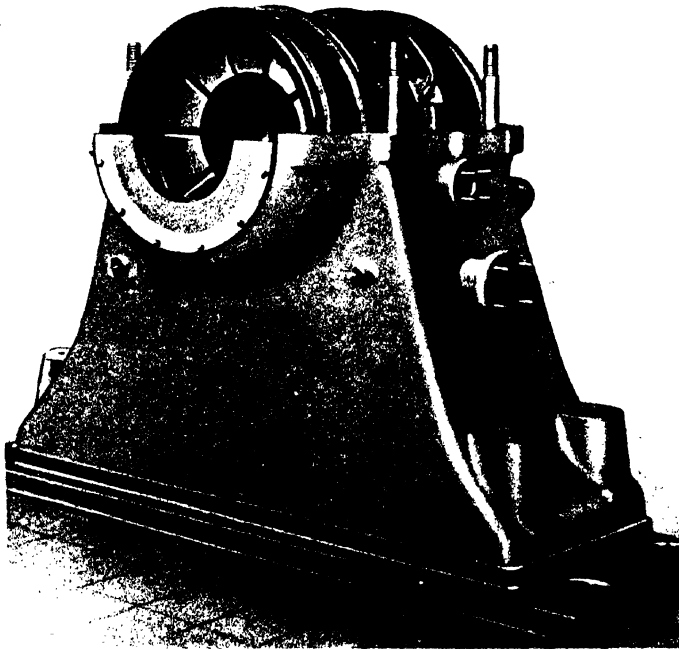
Double pivoted-pad thrust bearing combined with journal bearing by Messrs. Escher-Wyss, Zurich
